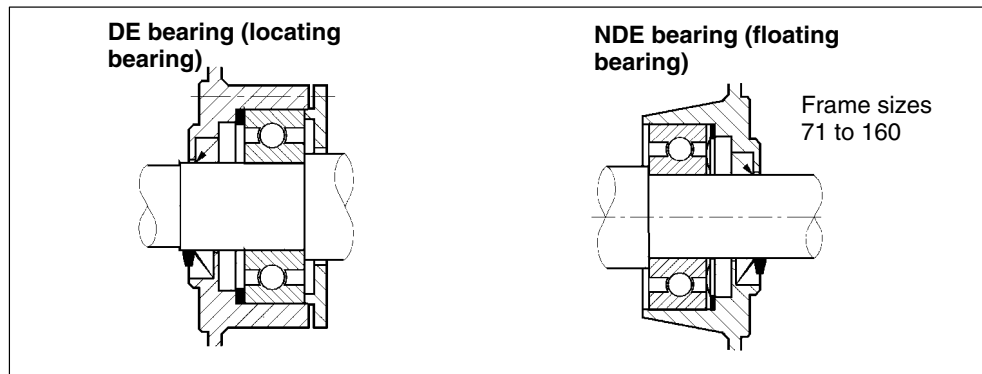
Locating bearing at DE and floating bearing at NDE
